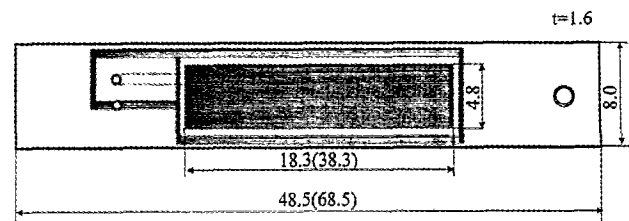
Detailed geometric dimensions of the capacitance sensor plate (unit: mm).
